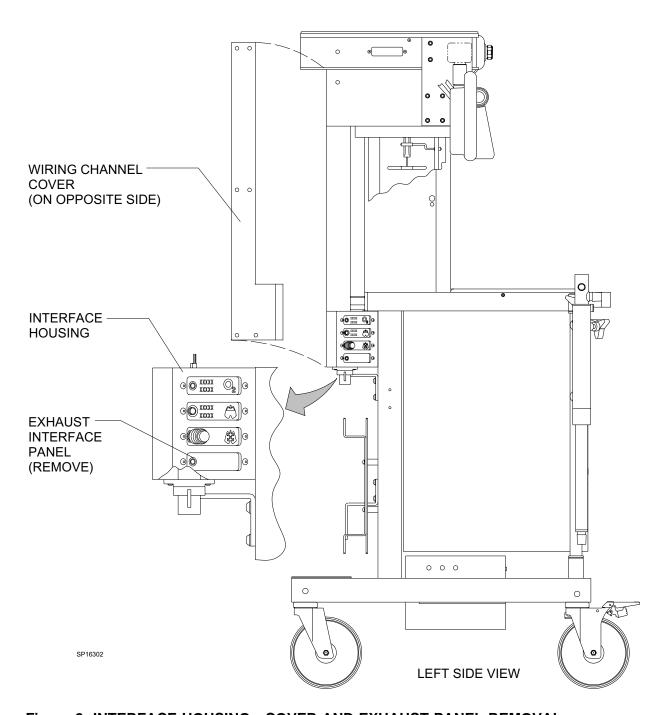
INTERFACE HOUSING - COVER AND EXHAUST PANEL REMOVAL
